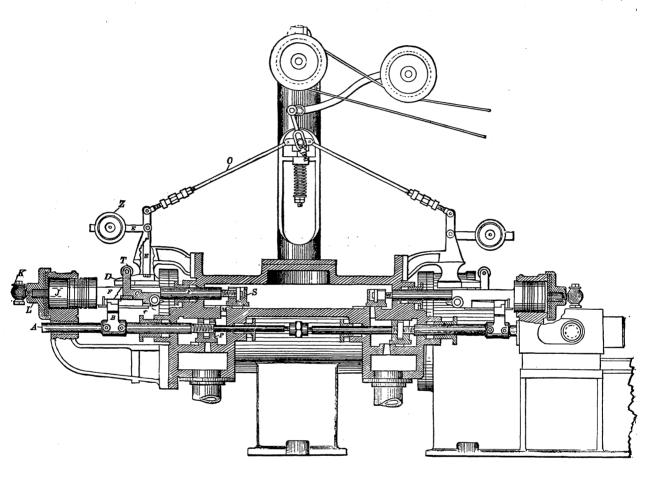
THE VALVE MOVEMENT OF THE THOMPSON ENGINE.
